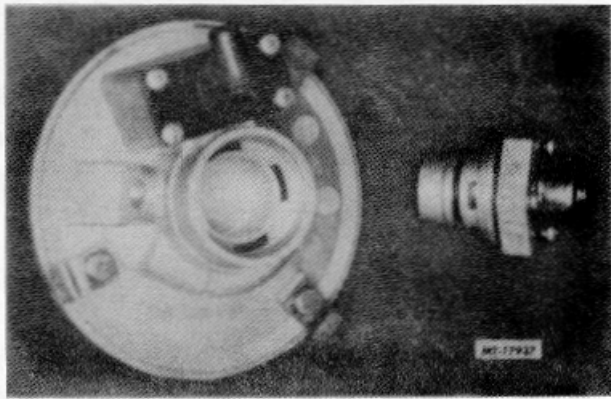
AD-2 End Cover Assembly with Purge Valve Assembly Removed
